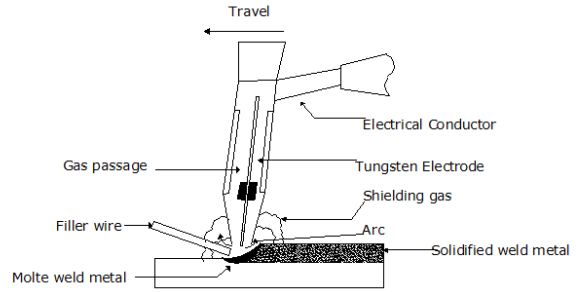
Tugsten Inert Gas Welding Process Schematic Drawing [1]
